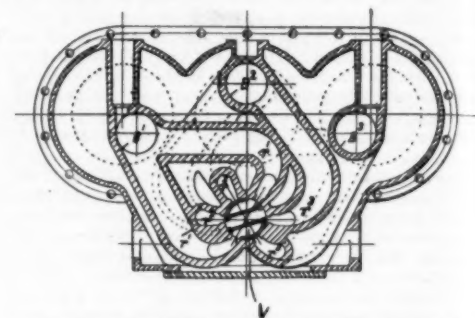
HORIZONTAL CROSS-SECTION THROUGH ROTARY VALVE OF THREE-CYLINDER ENGINE.
